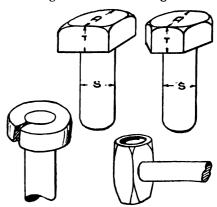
A WELDED HEAD. Figs. 62 and 63. CHAMPFERED HEADS AND CUPPING TOOL.
